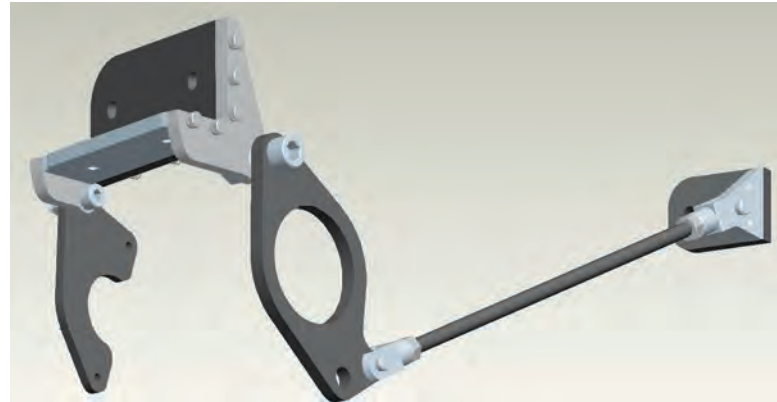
This CAD view shows all of the components used to fix the starter motor in place.
